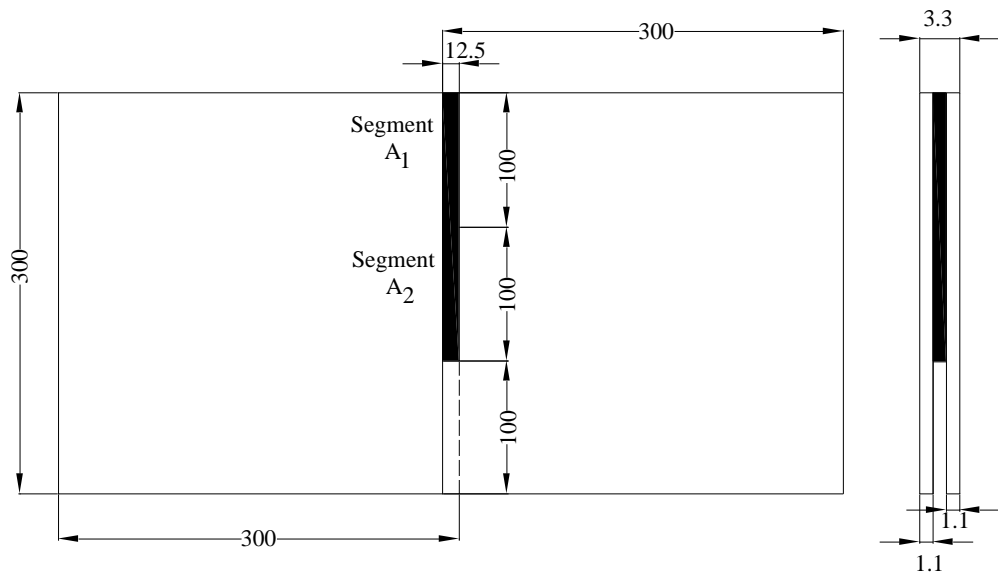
Geometric dimensions of plates with an adhesive lap joint (Case-3)
